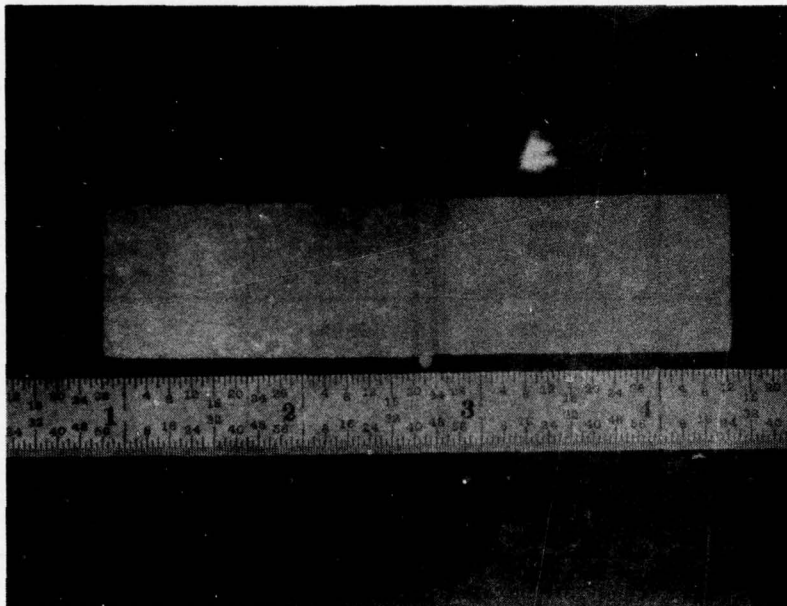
Macro-Section of HY 130 Steel Butt Weld
